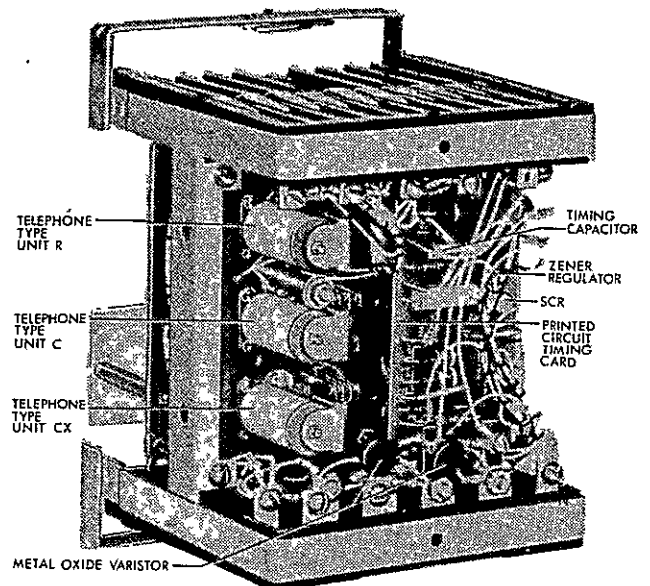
(8041772) Type NLR21E Relay Removed from Case (Back View)
